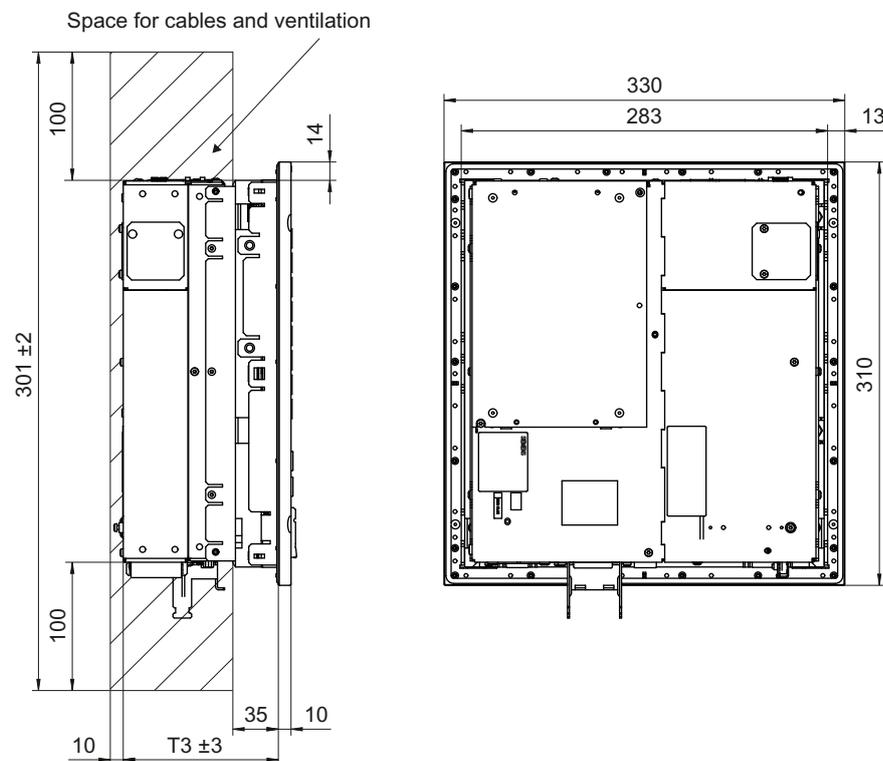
Mounting the PCU to the OP 010S operator panel front with clearances
